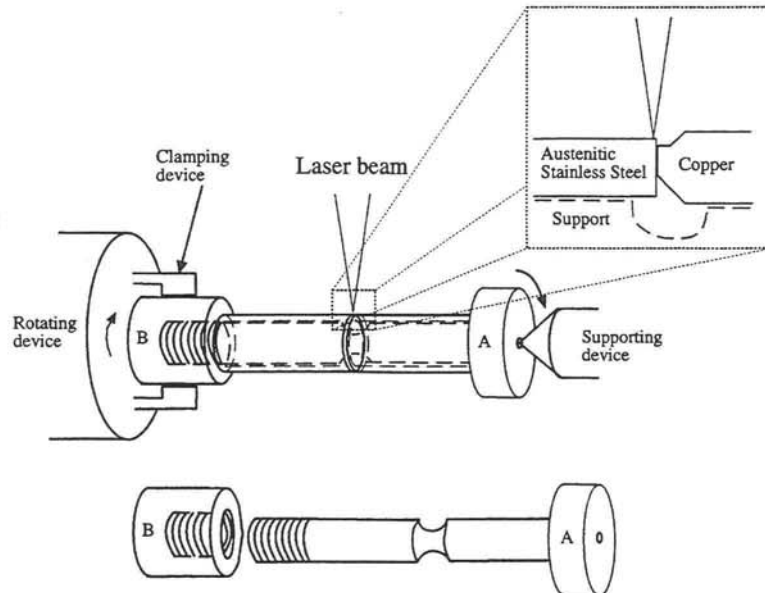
Experimental set-up when welding tubes, run 2. Improved support where part A is put through the tubes to be welded before it is screwed into part B. This fixture allowed the welded parts to contract during solidification.
